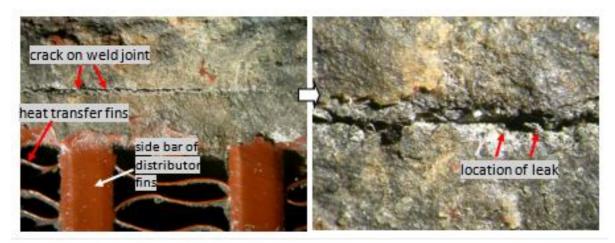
Close up view of the corroded surface area around the weld joint that caused the after-cooler to leak
